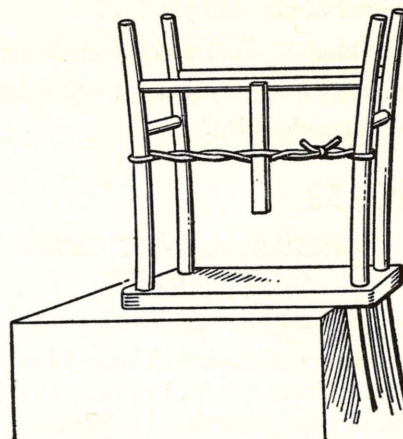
Rope may be twisted to take the place of a clamp for holding glue joints
